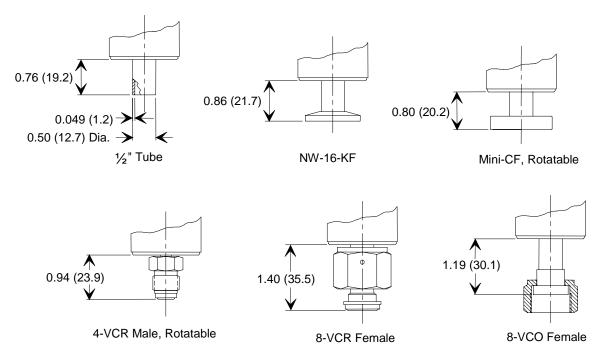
Fitting Dimensions for the Low Pressure Type 722B Transducer
